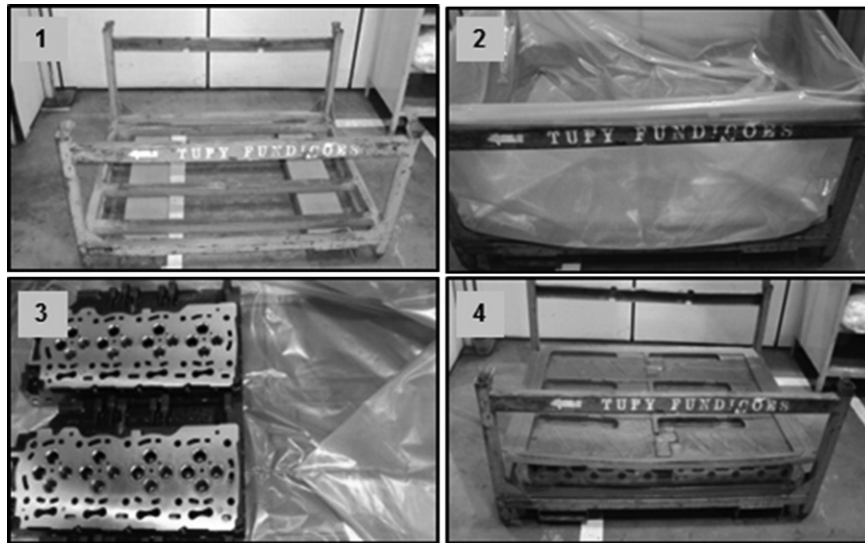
Returnable packaging assembly steps: (1) metallic rack, (2) VCI plastic bag wrapping, (3) arrangement of engine heads, (4) use of vacuum formed plastic tray.
